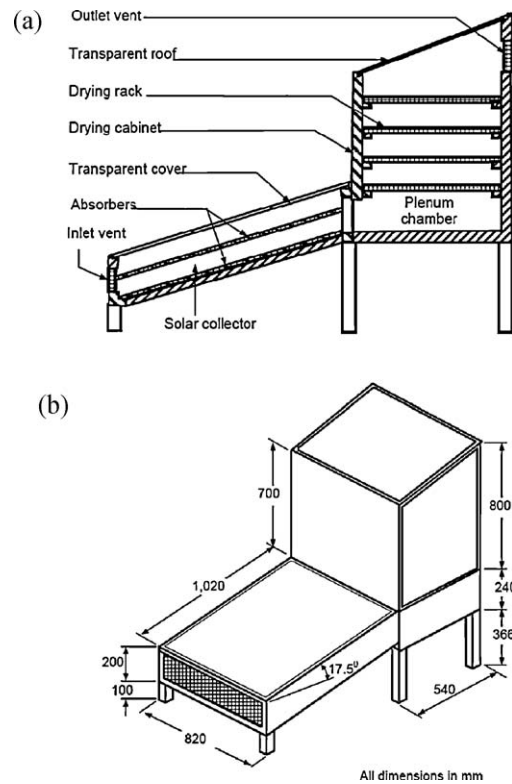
A mixed-mode solar dryer: (a) sectional view and (b) isometric drawing [21].
